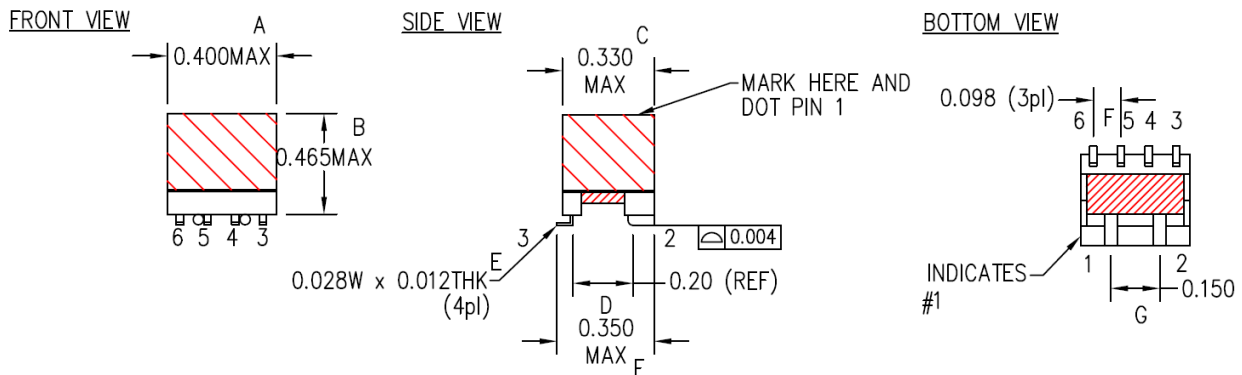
Renco RL-10950 Mechanical Drawing (dimensions in inches)
